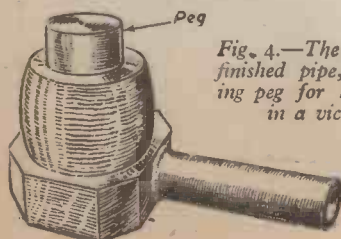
The partly finished pipe, showing peg for holding in a vice.
